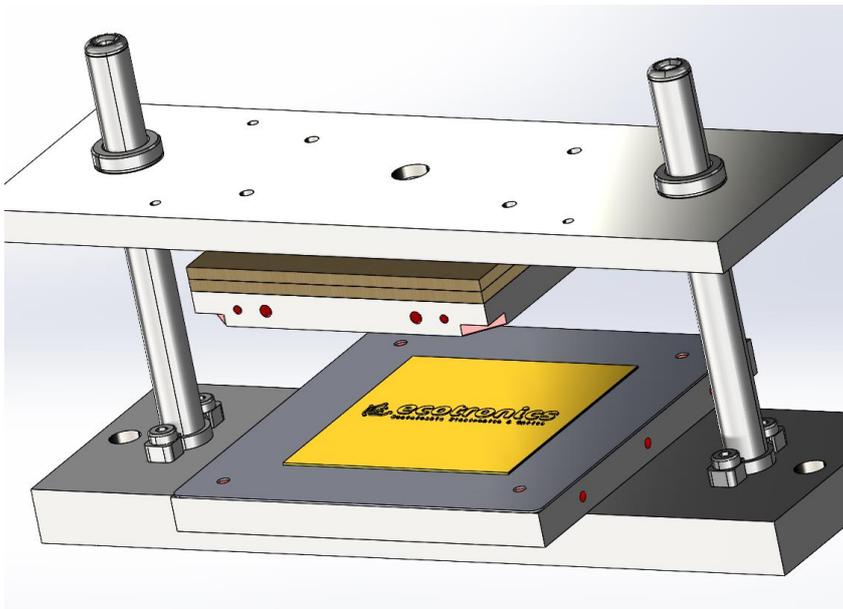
Embossing tooling and tool holding configuration in SolidWorks.
